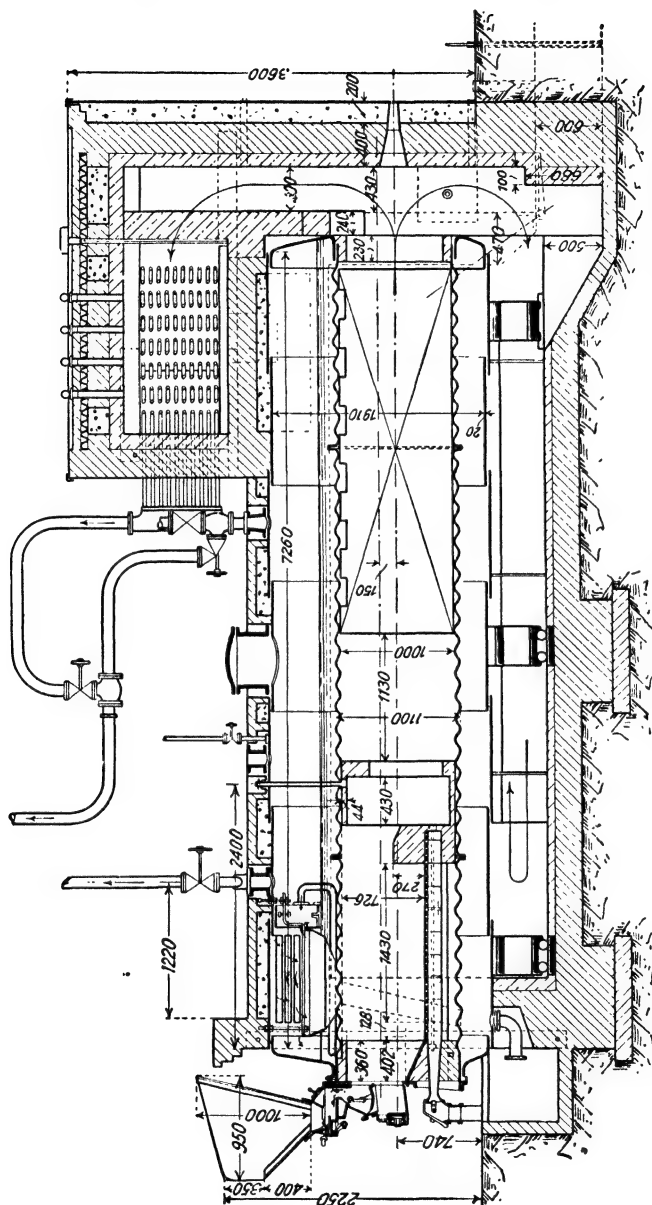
Cornish Boiler with a Heating Surface of 380 sq. ft. and a Superheater of 380 sq. ft.; pressure 175 lb. per square inch
